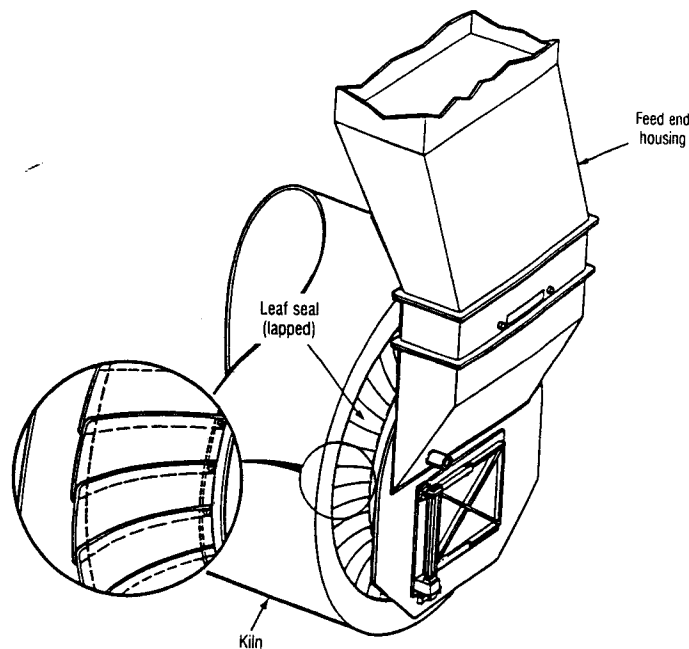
Kiln feed end assembly (Courtesy Boliden Allis)
